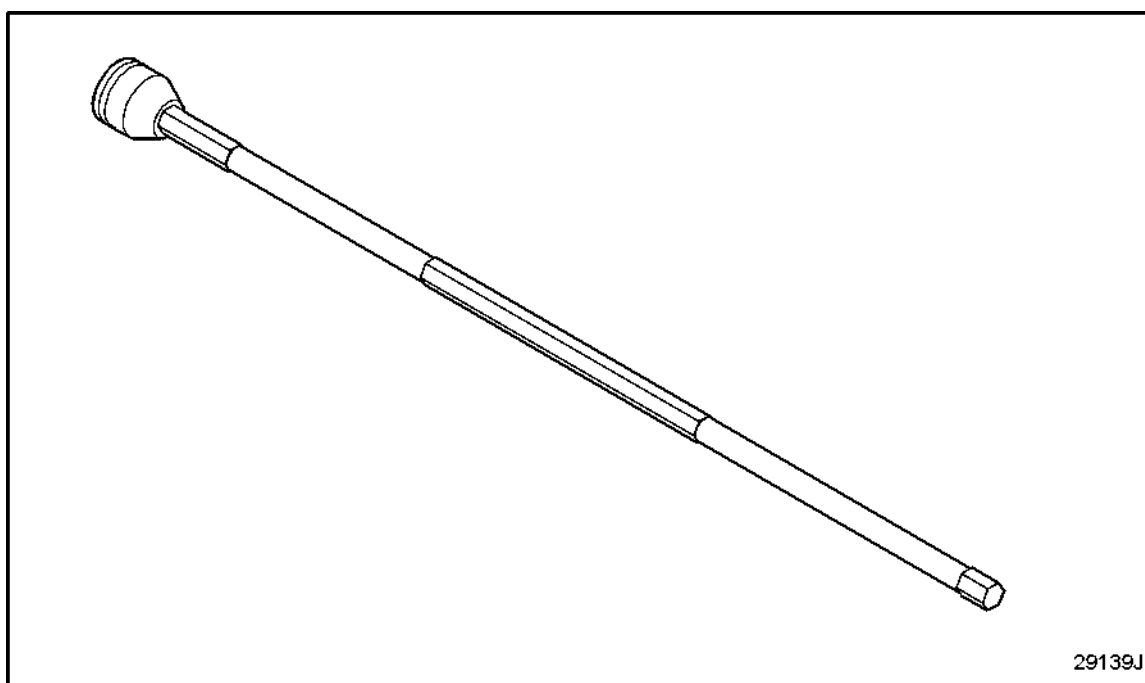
Block Assembly Wrench Set (16V),J 28651
